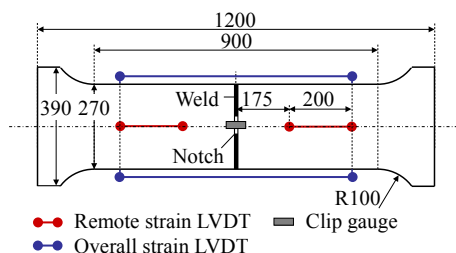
CWP-2: Specimen geometry and positions of sensors (inner diameter surface).
